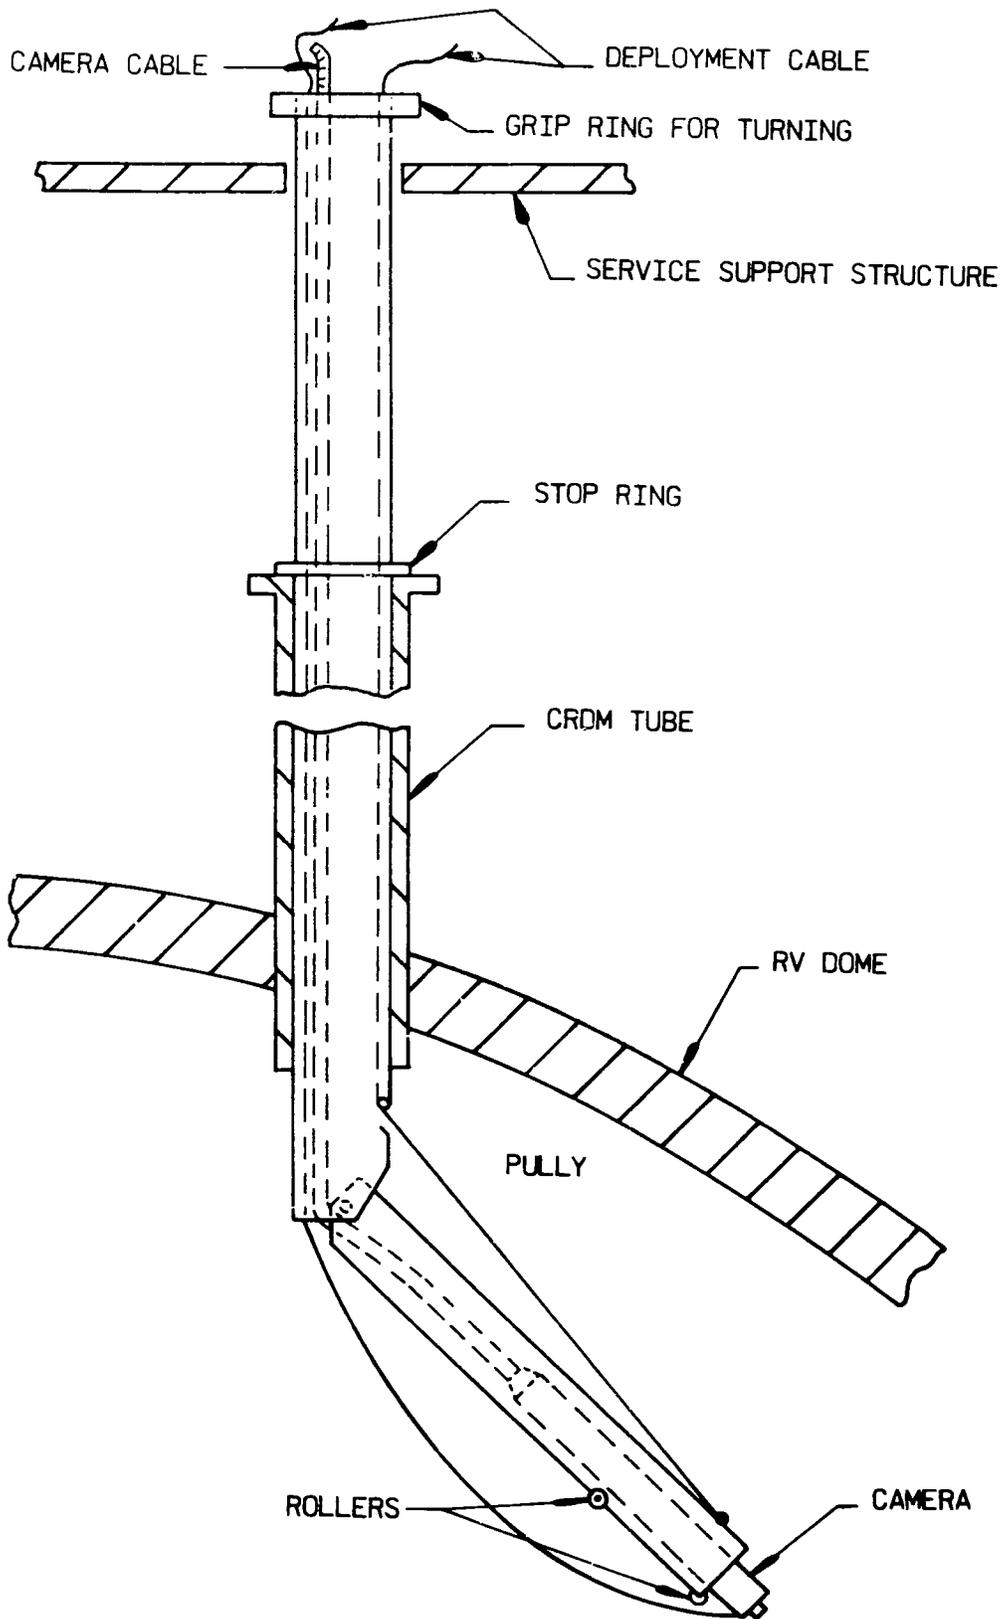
Hinged Tube Manipulator for Auxiliary Lights
